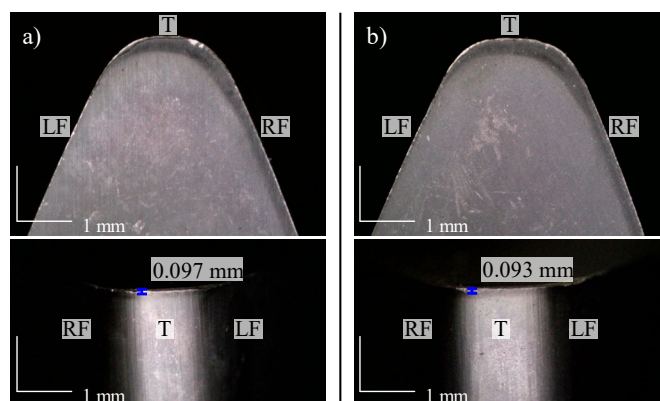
Wear on tool 2 after machining 50 workpieces: a) SOL; b) EOL.
